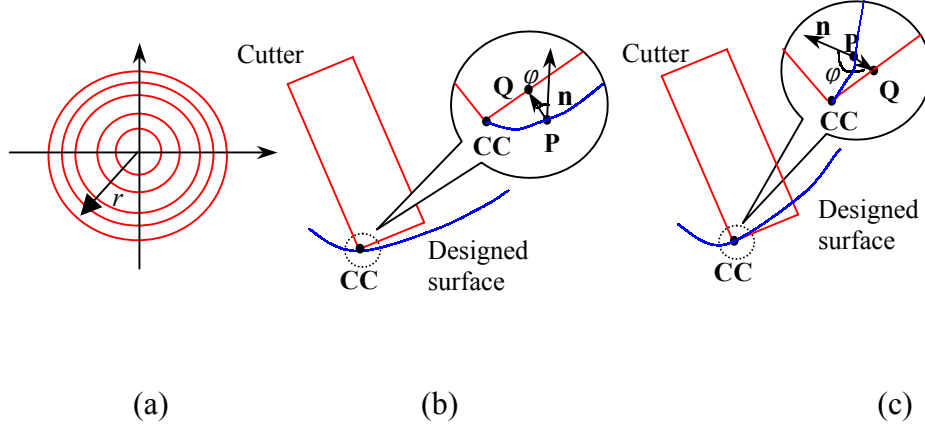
Interference checking of cutter bottom plane and designed surface
